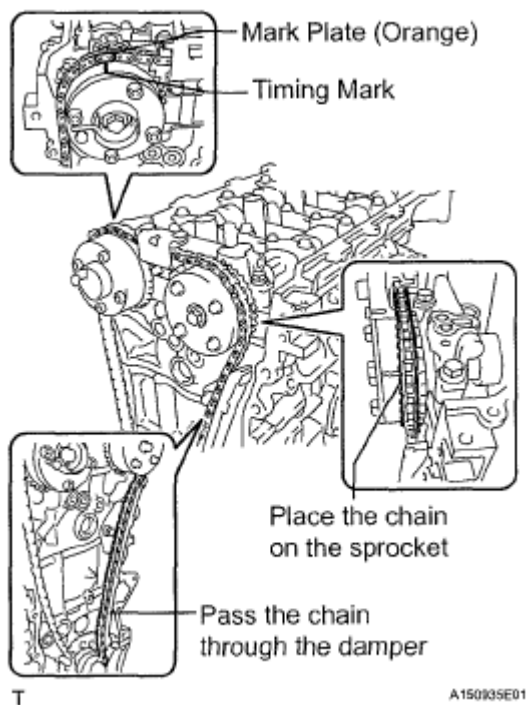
Identifying Timing Mark Of No. 2 Camshaft
